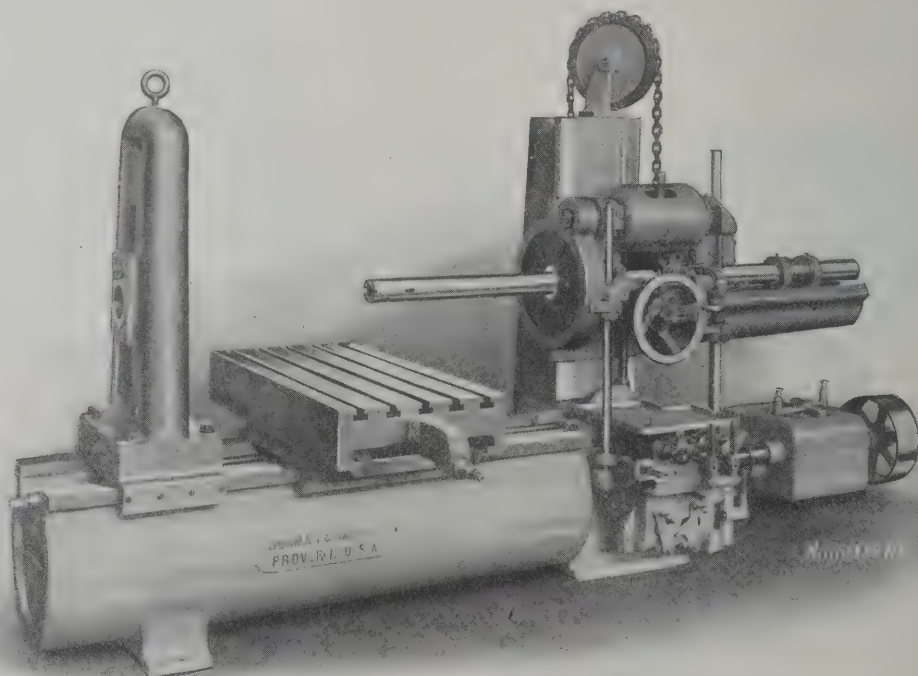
Beaman & Smith Horizontal Boring and Milling Machine
